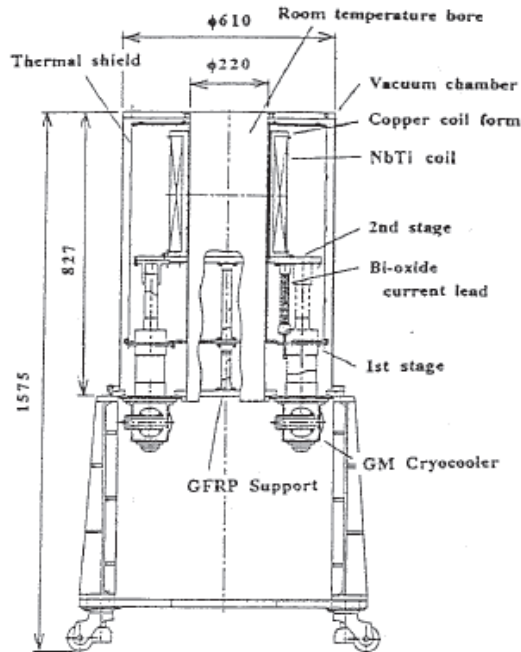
Sectional view of the cryocooler cooled 6T NbTi superconducting magnet with room temperature bore of 220 mm [24]
